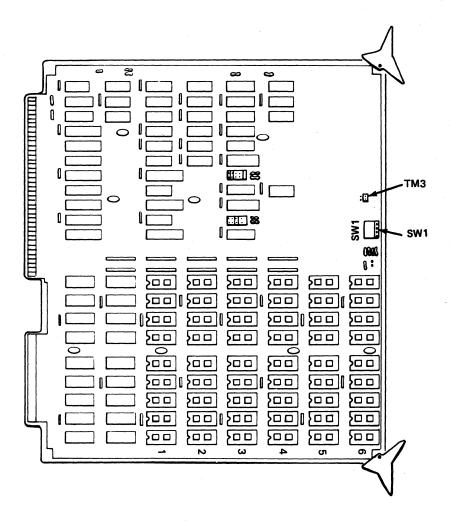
TM3 Jumper Location on the APC-H31 PCB Revision 1
